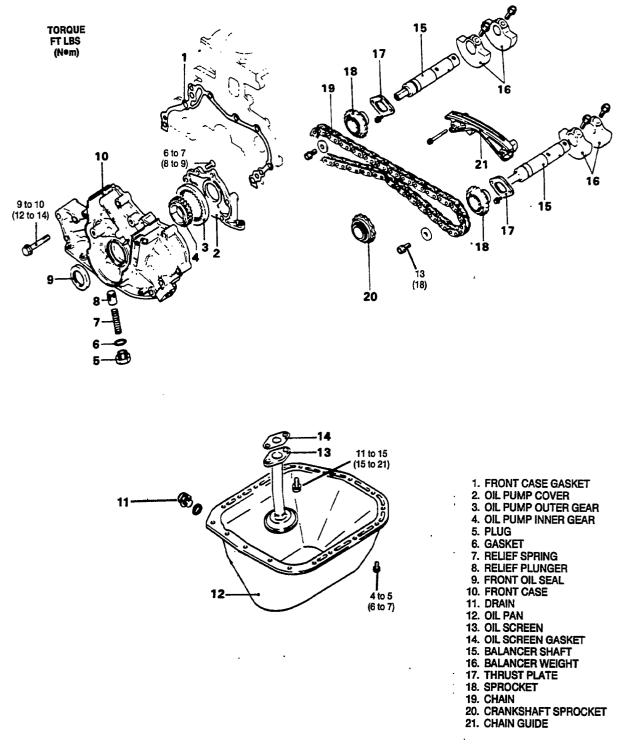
FRONT CASE, BALANCER SHAFTS, OIL PUMP
